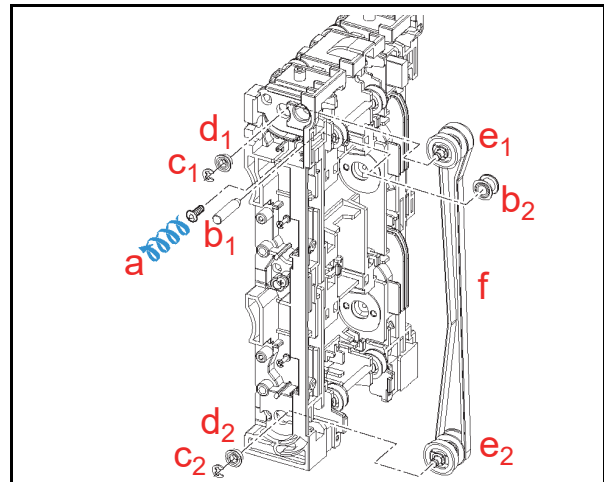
Rear Transport Upper Frame & Shaft Removal
